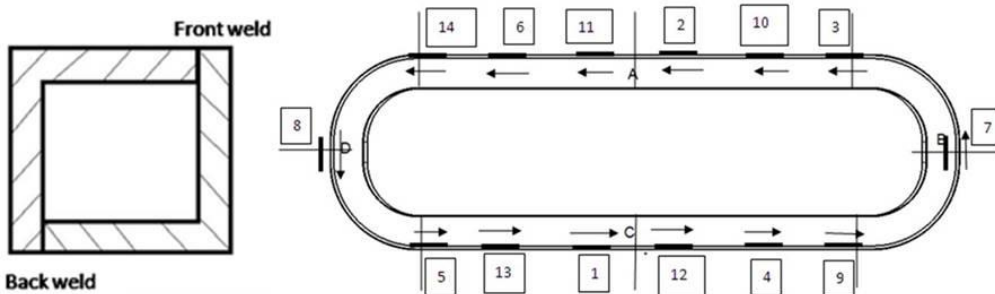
The positioned welding sequence of model case closure welding
